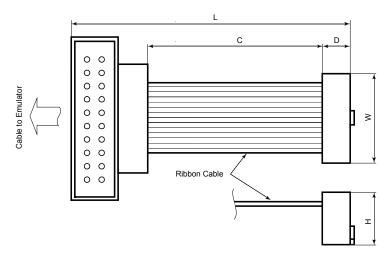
The dimensions of the ADA-JET-ARM14 probe with a cable extender. L=63.0 mm (2.5 in.), C=40.0 mm (1.55 in.) D=6.0 mm (.24 in.), W=22.5 mm (.9 in.), H=11.5 mm (0.45 in.).
